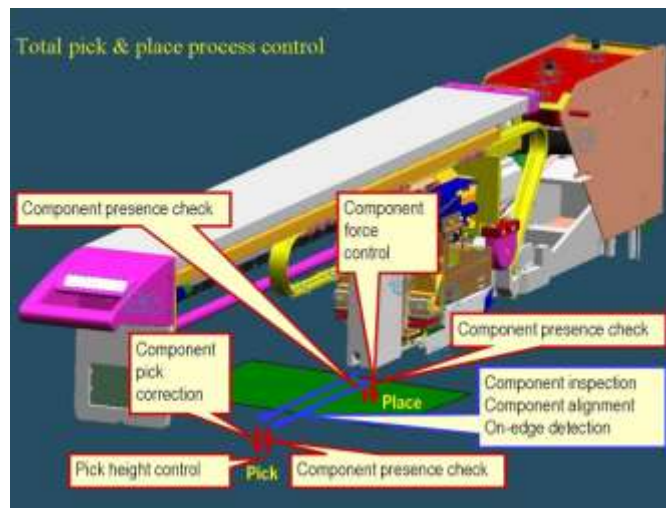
Unlike sequential placement (turret-based) machines, parallel placement machines pick a single component, transport it to the board, and place it.
